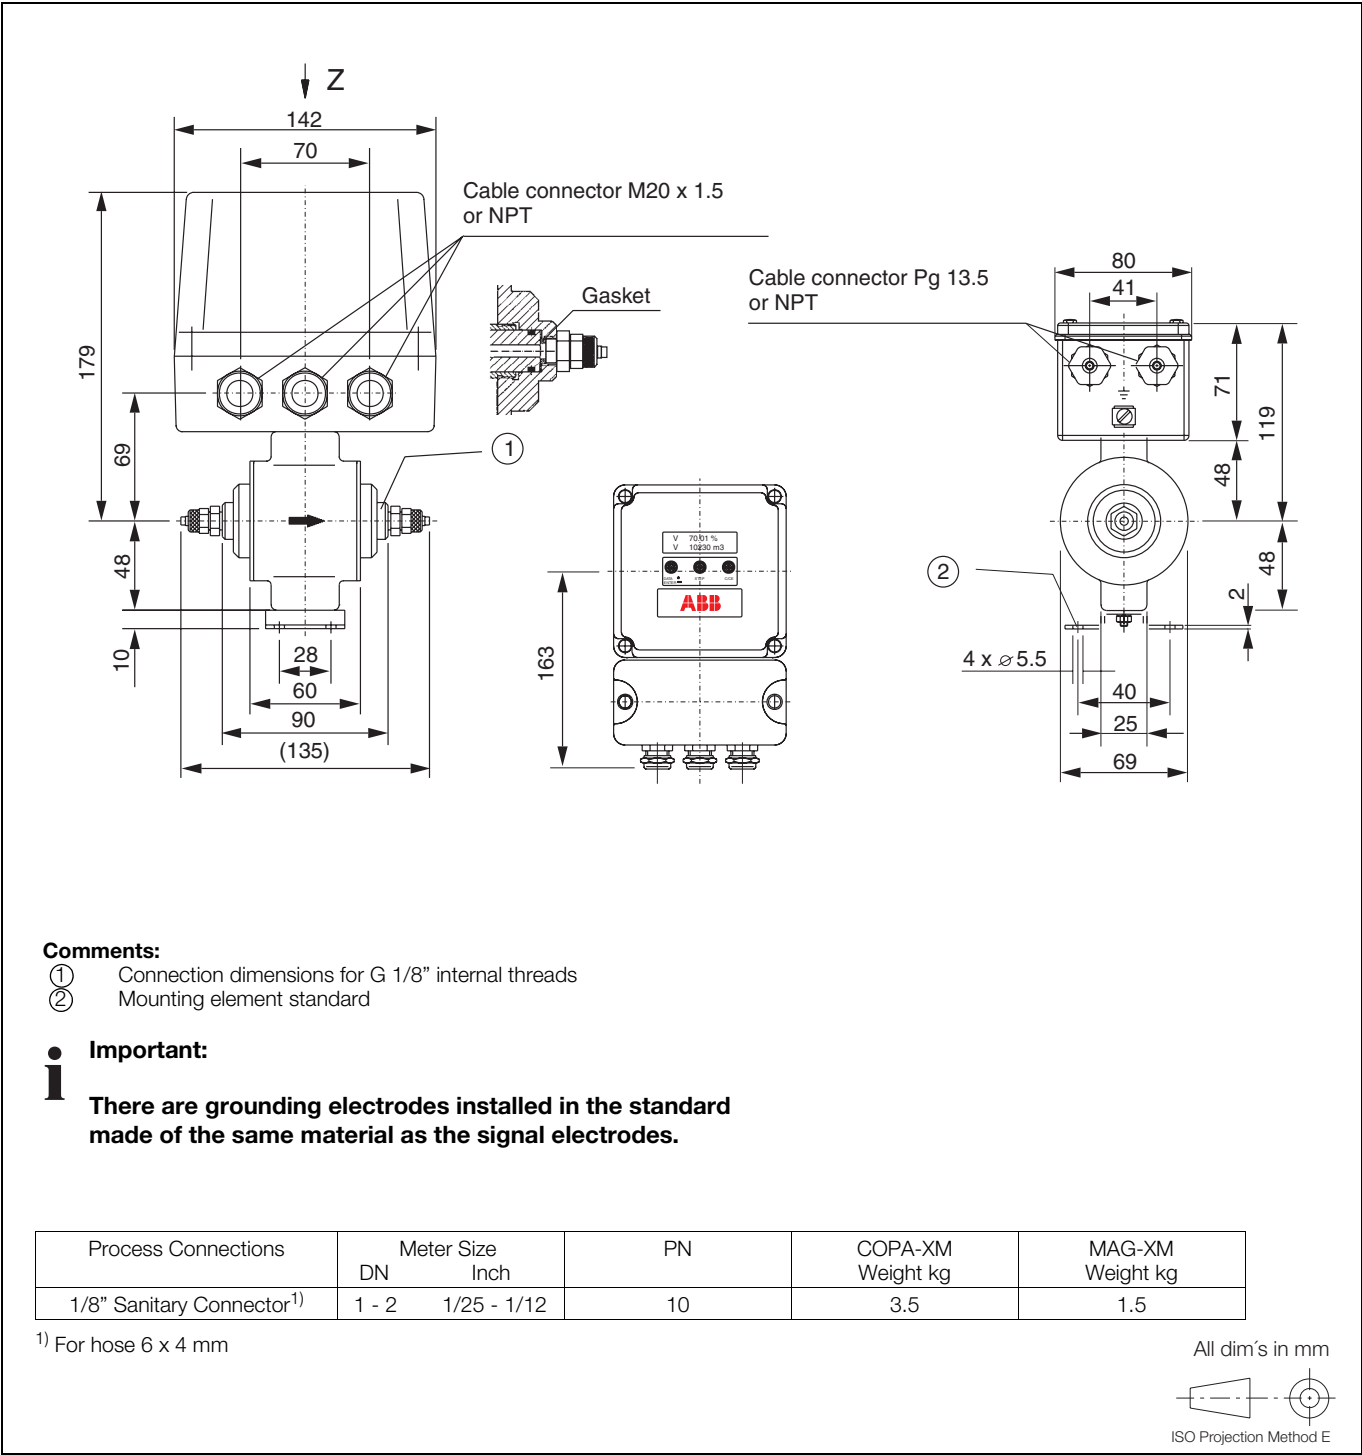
Dimension Drawings: Flowmeter Primaries DN 1 to DN 2 [1/25" to 1/12"], Models DM23B and DM21B
